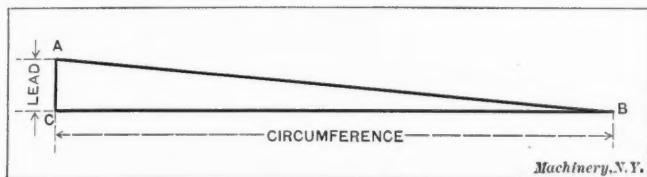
Diagram for Determining Angle of Threads in Thread Rolling Dies
